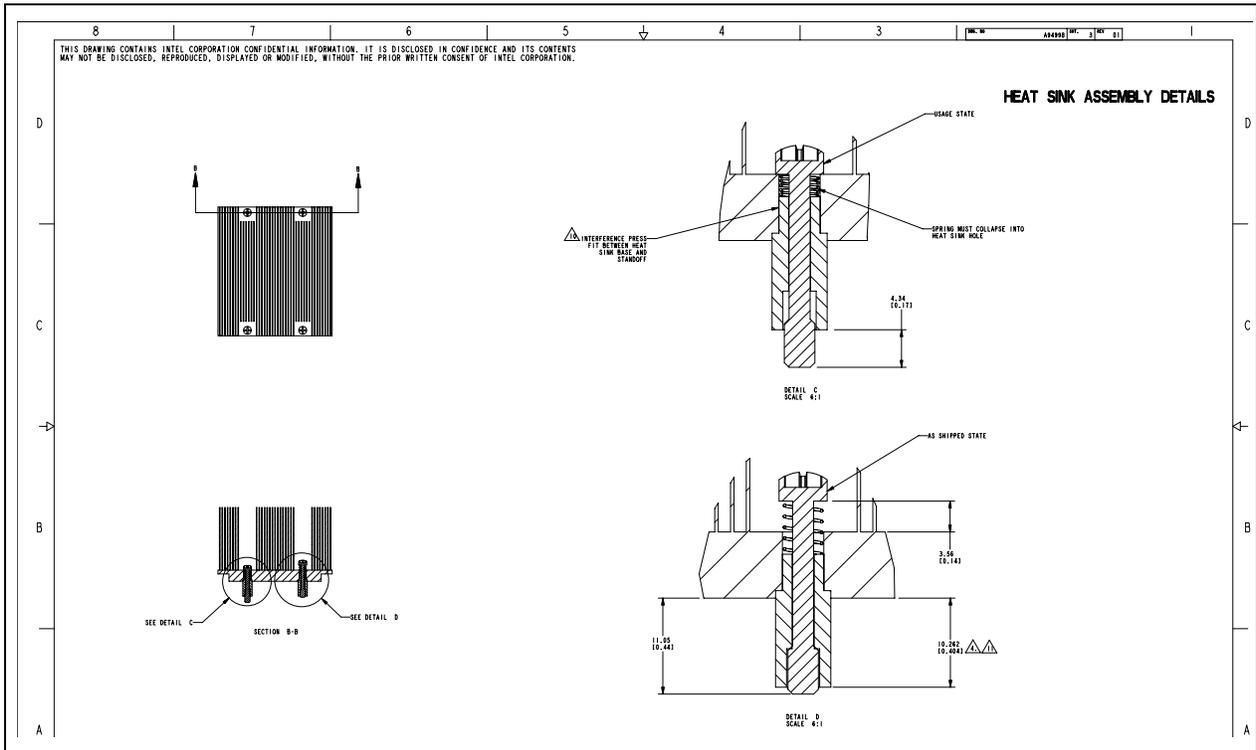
2U Cooling Solution Heatsink (Sheet 4 of 4)
